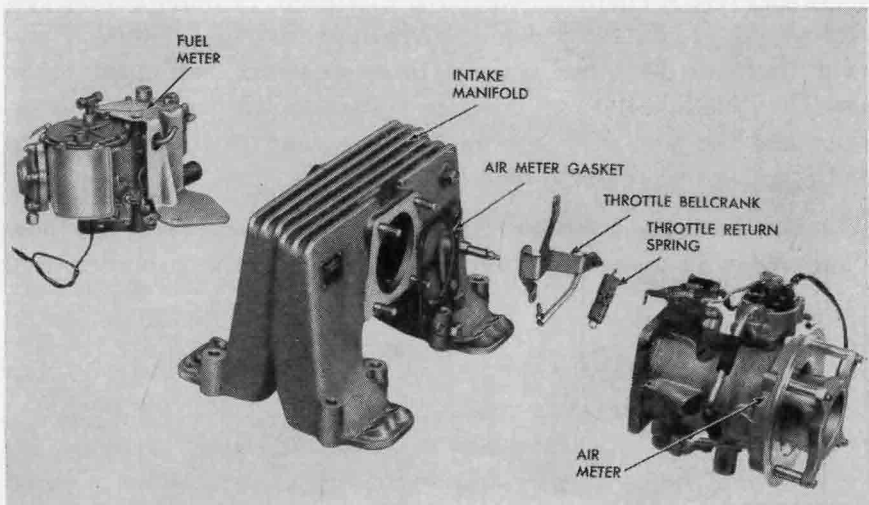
Basic components of fuel-injection system. (*Chevrolet Motor Division of General Motors Corporation*)
